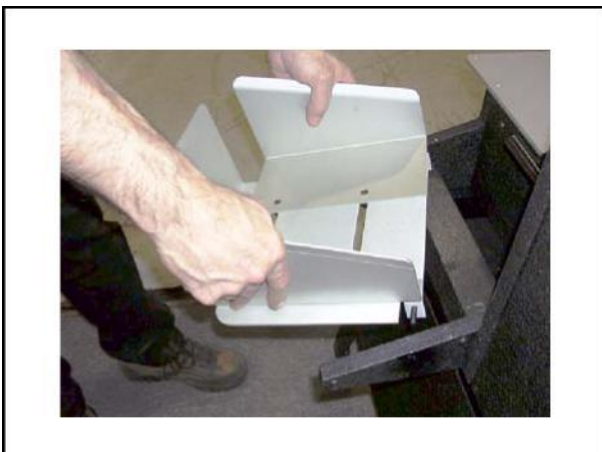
Insert Spring Loaded Pins in to Mounting Holes
